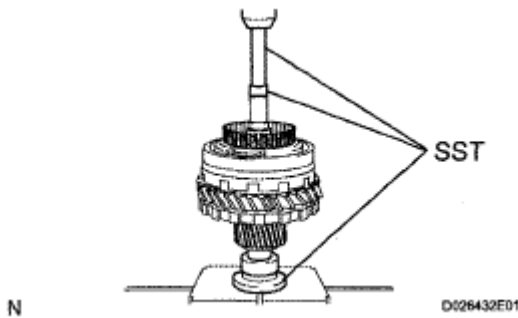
Pressing Cylindrical Roller Bearing Race Inner
